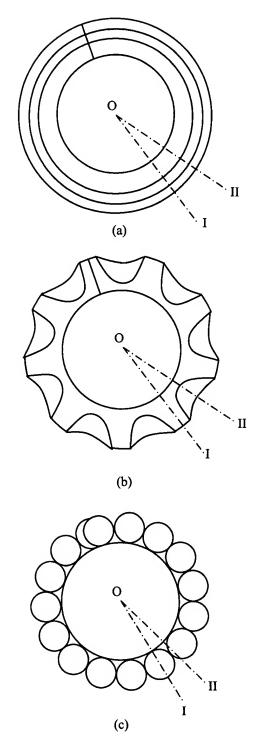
(a) Top view of the helical implant of the present invention; (b) Top view of the thread-cutting screw of Dicke '853; (c) top view of the dental implant of Hansson '838.
